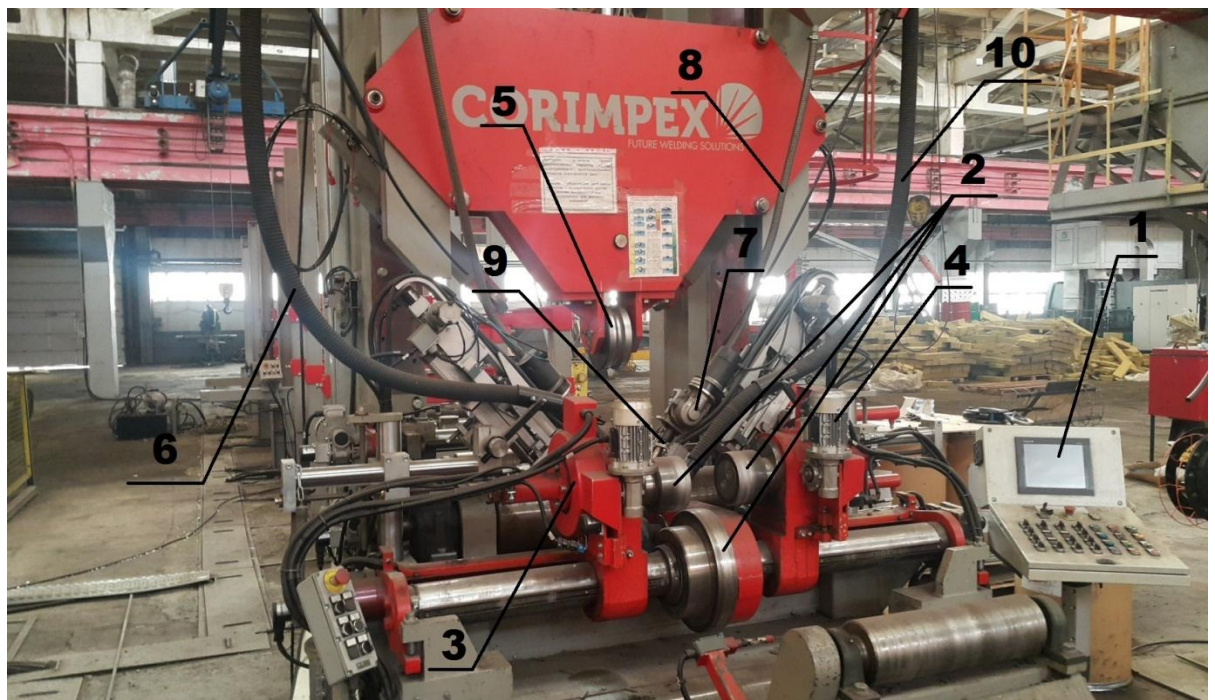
Welding section of the Corimpex BWM-TC 1200x600 line
